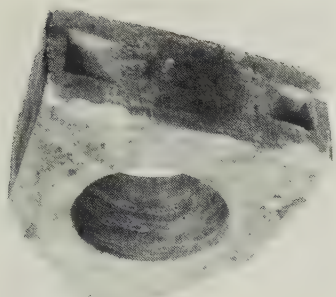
Transformer Unit Constructed Separately by Side Ramming.
